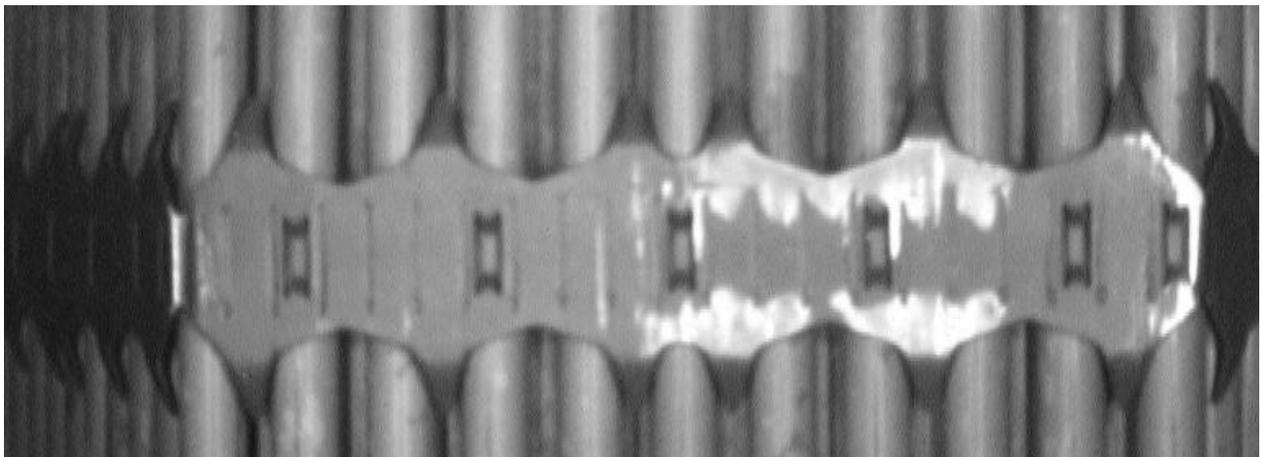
Burnishes on Inconel grid 6 on WLTA AA03-03 face 3 after fourth operation cycle.
